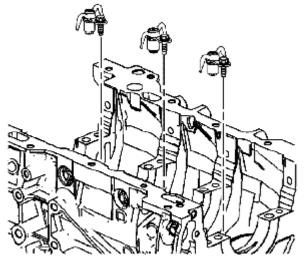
Identifying Right Front Oil Pan Rail Oil Gallery Expansion Plug Courtesy of SUZUKI OF AMERICA CORP.
